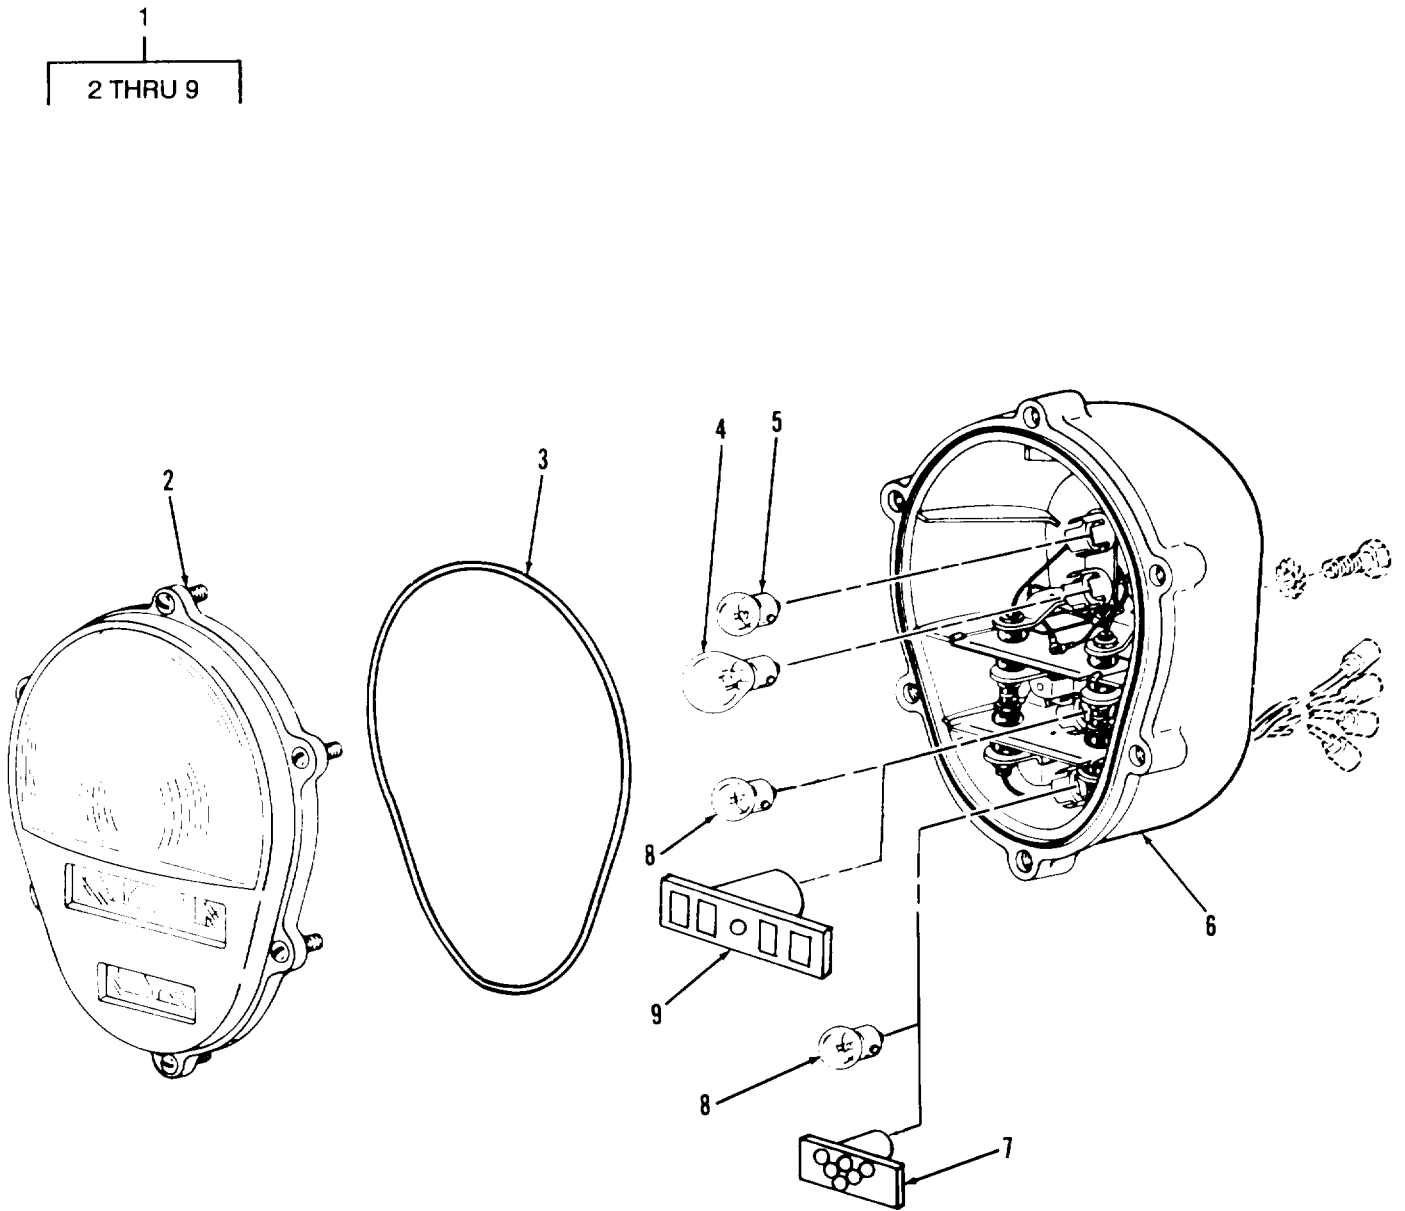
COMPOSITE LIGHT ASSEMBLY.
